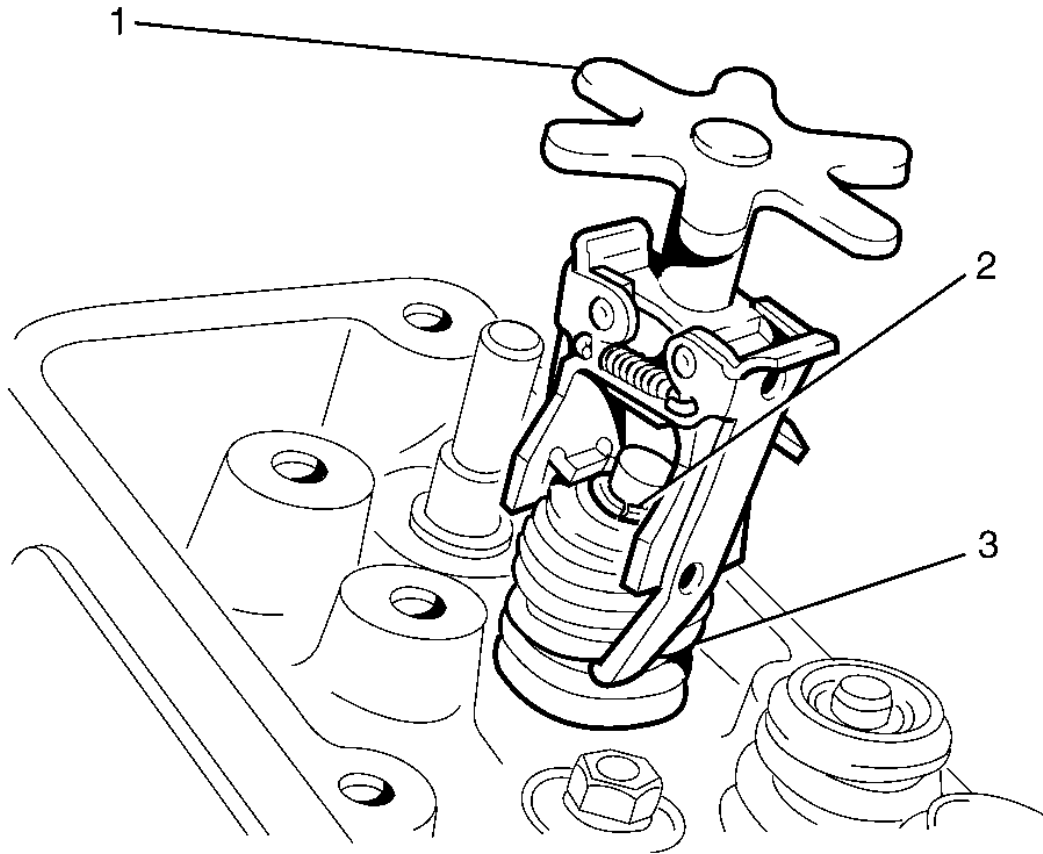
Locating J 38606, Valve Spring Retaining Cap Collets & Valve Spring
